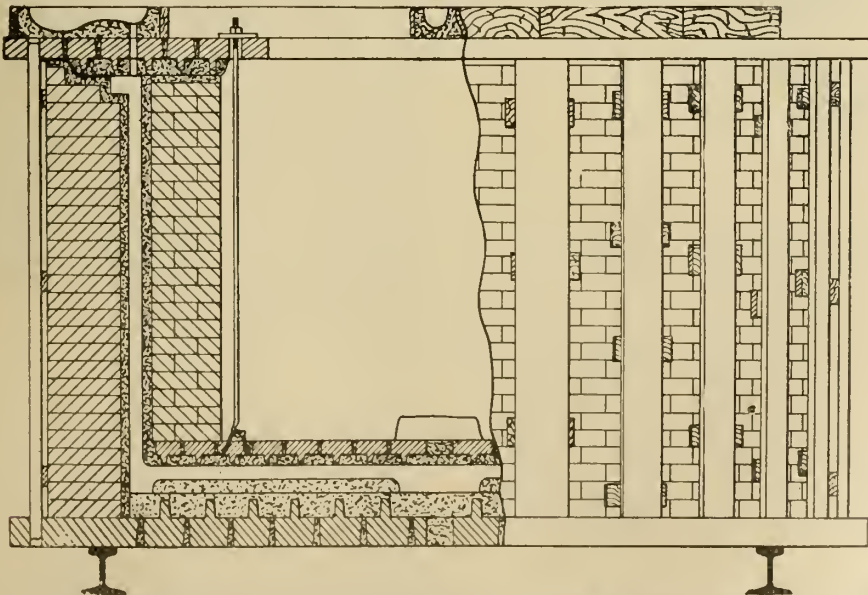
LEFT SHOWS SECTION OF INSIDE OF MOLD AND CORE—RIGHT SHOWS OUTSIDE APPEARANCE, WITH UPRIGHT SLATS WEDGED TO BRICKWORK TO PREVENT SPREADING
